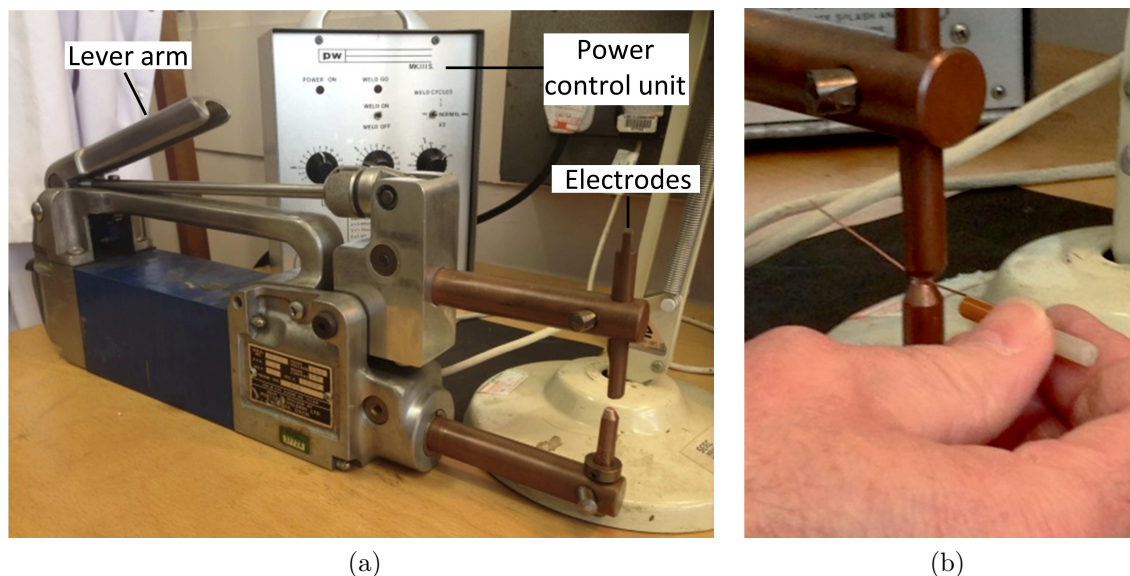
(a) Photograph of the spot welding equipment used to produce all joints in this study. (b) Magnified image of twisted wires being spot welded between the electrodes
